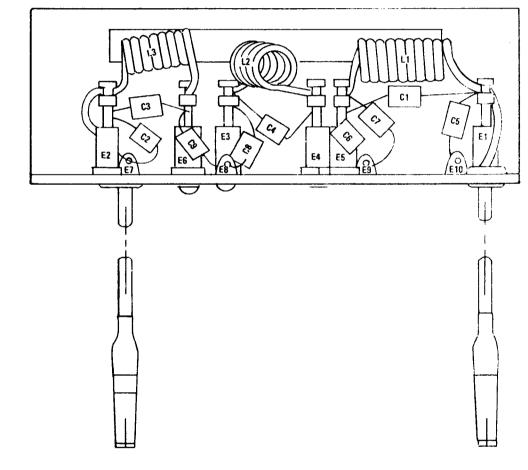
Regulator Assembly 1A14A6, PN 755017A4031
